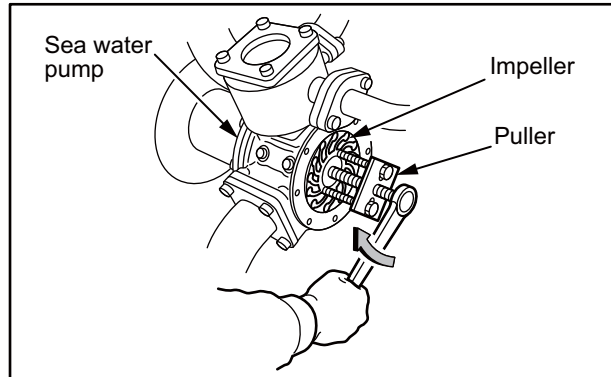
Seawater Pump Impeller - Inspect
